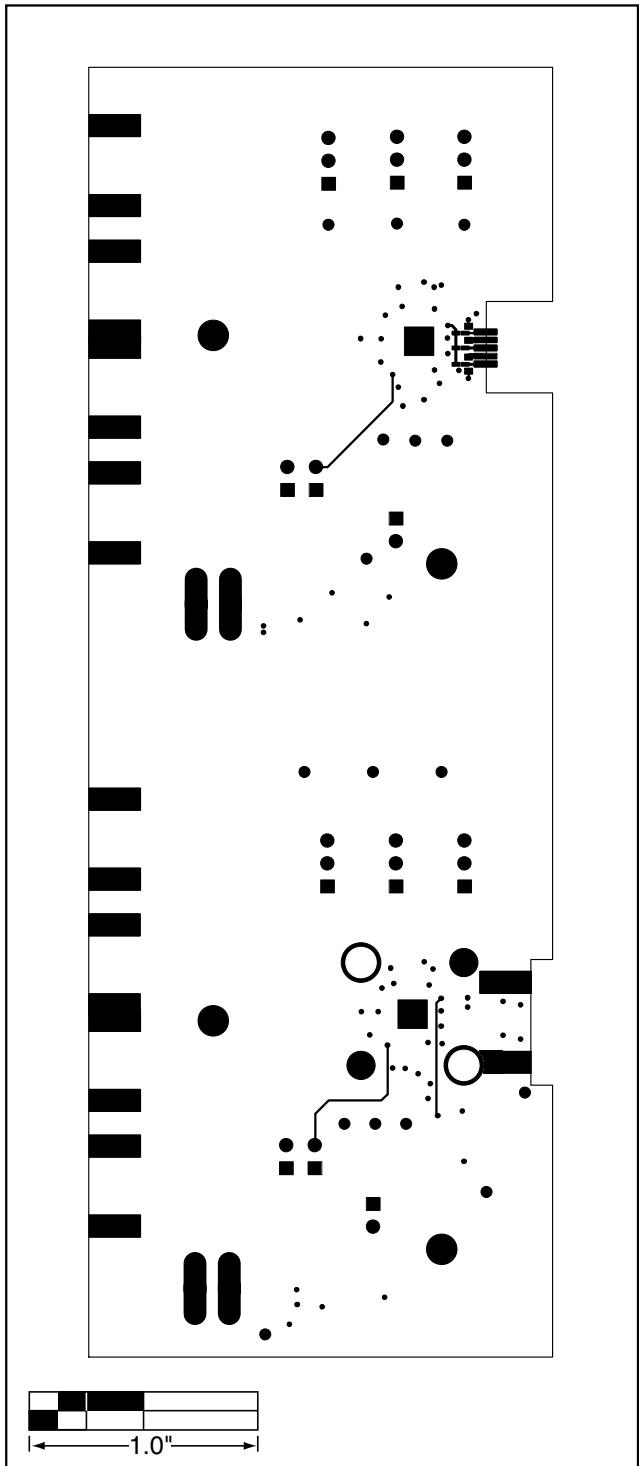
MAX3850 EV Kit PC Board Layout—Solder Side
